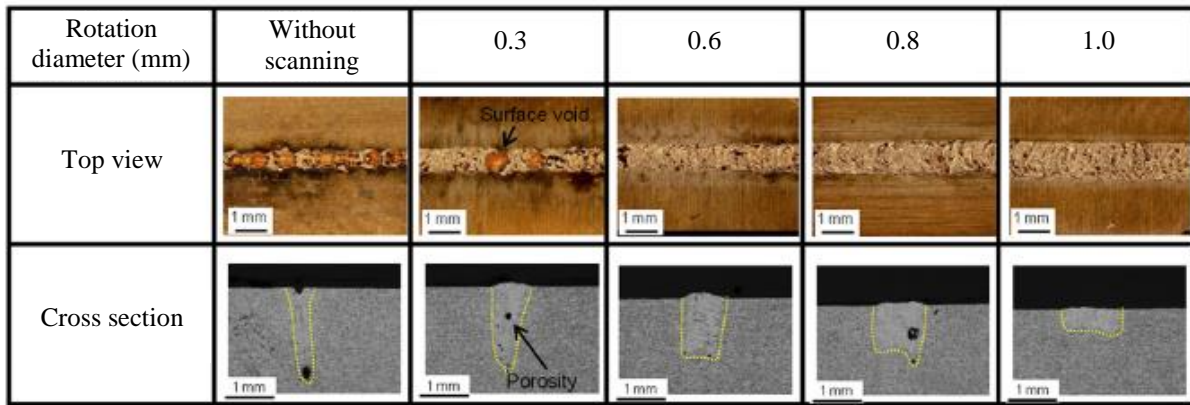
Laser beam welded copper sample, Cu-ETP (laser power = 1500 W, welding speed = 50 mm/s, rotation frequency = 200 Hz) [42].
